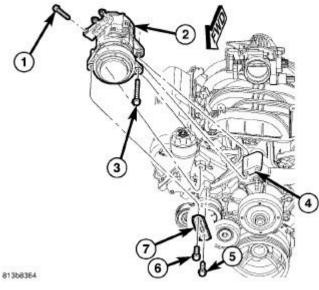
A/C Compressor Removal/Installation Courtesy of CHRYSLER LLC
